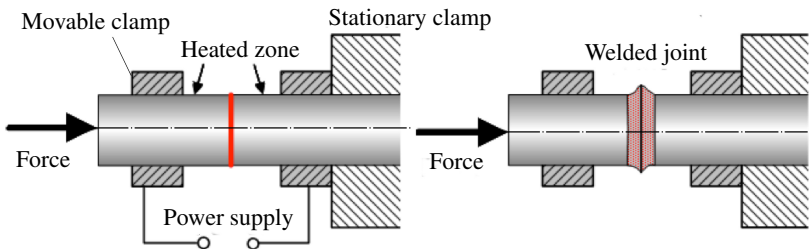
General arrangement of upset welding. Adapted from Campos (2016).
